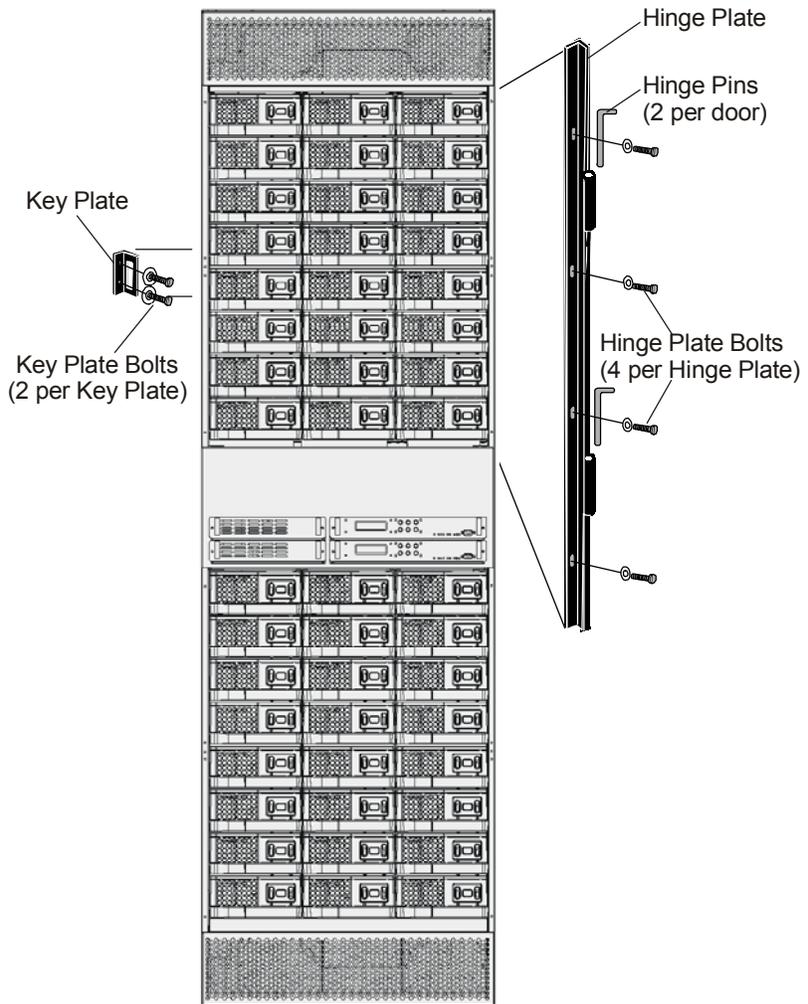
SLD96 Rack Showing Hinge Plate and Doors
